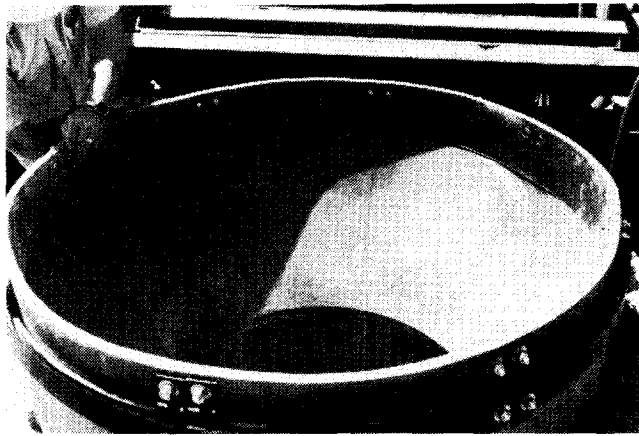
Installation of one-piece resilient crusher feed cone liner.
